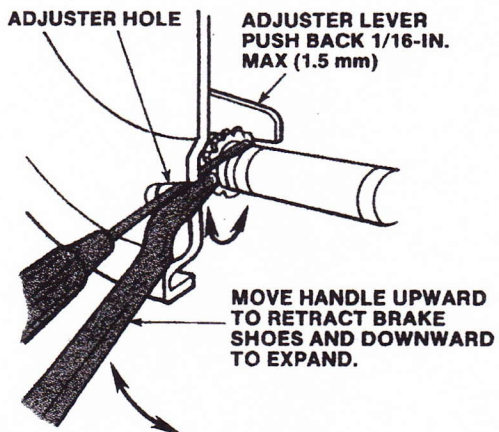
Removing brake drums equipped with self-adjusters.
